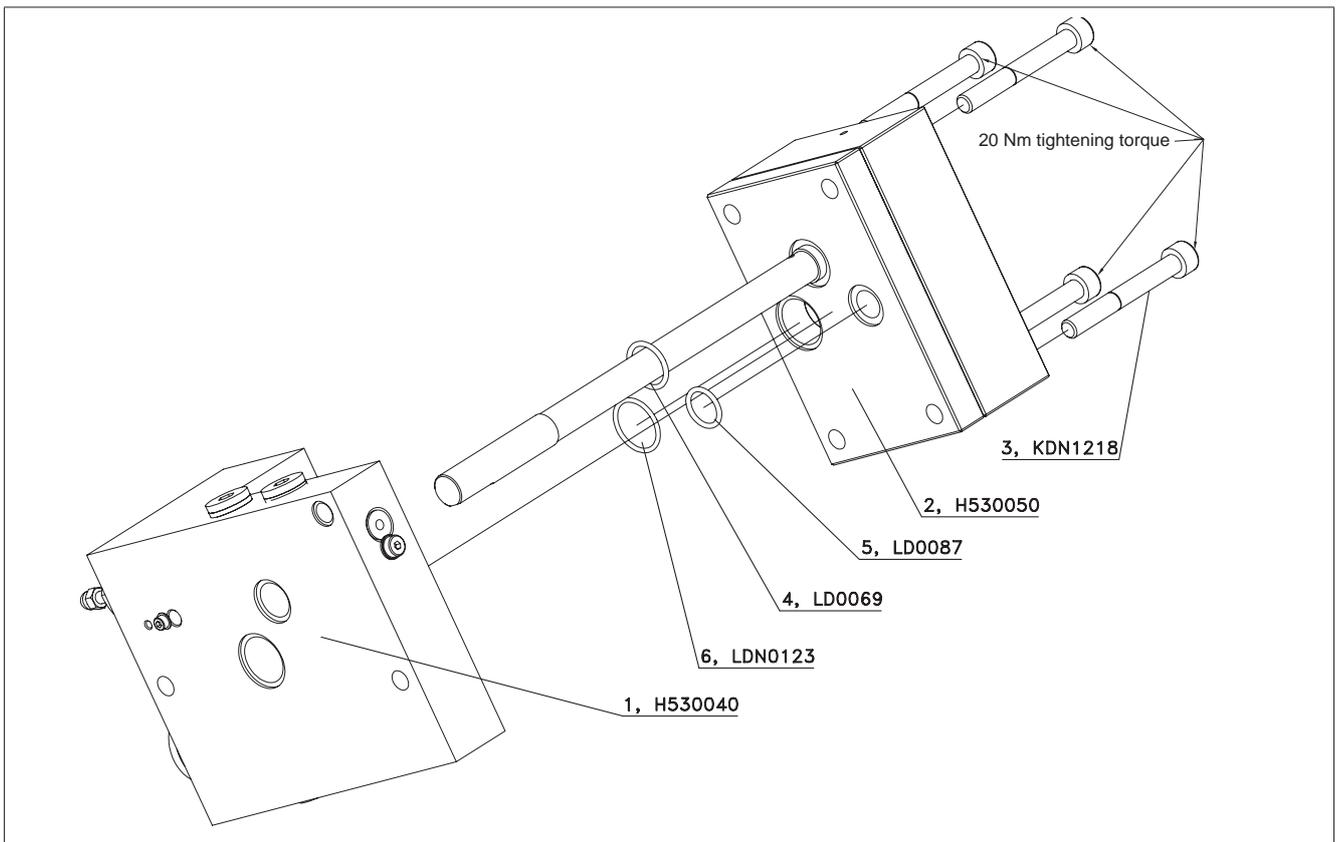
/6: Spare parts for basic unit, connection block with gear wheel pump
